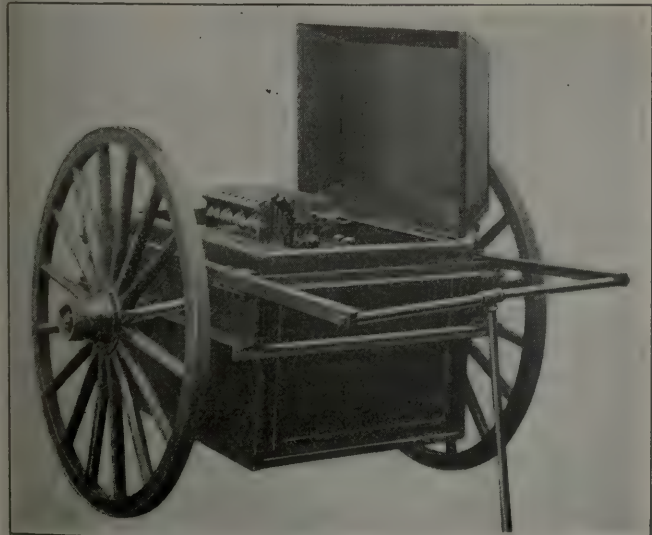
GENERATOR FOR USE IN MAKING ELECTRIC ARC WELDS
